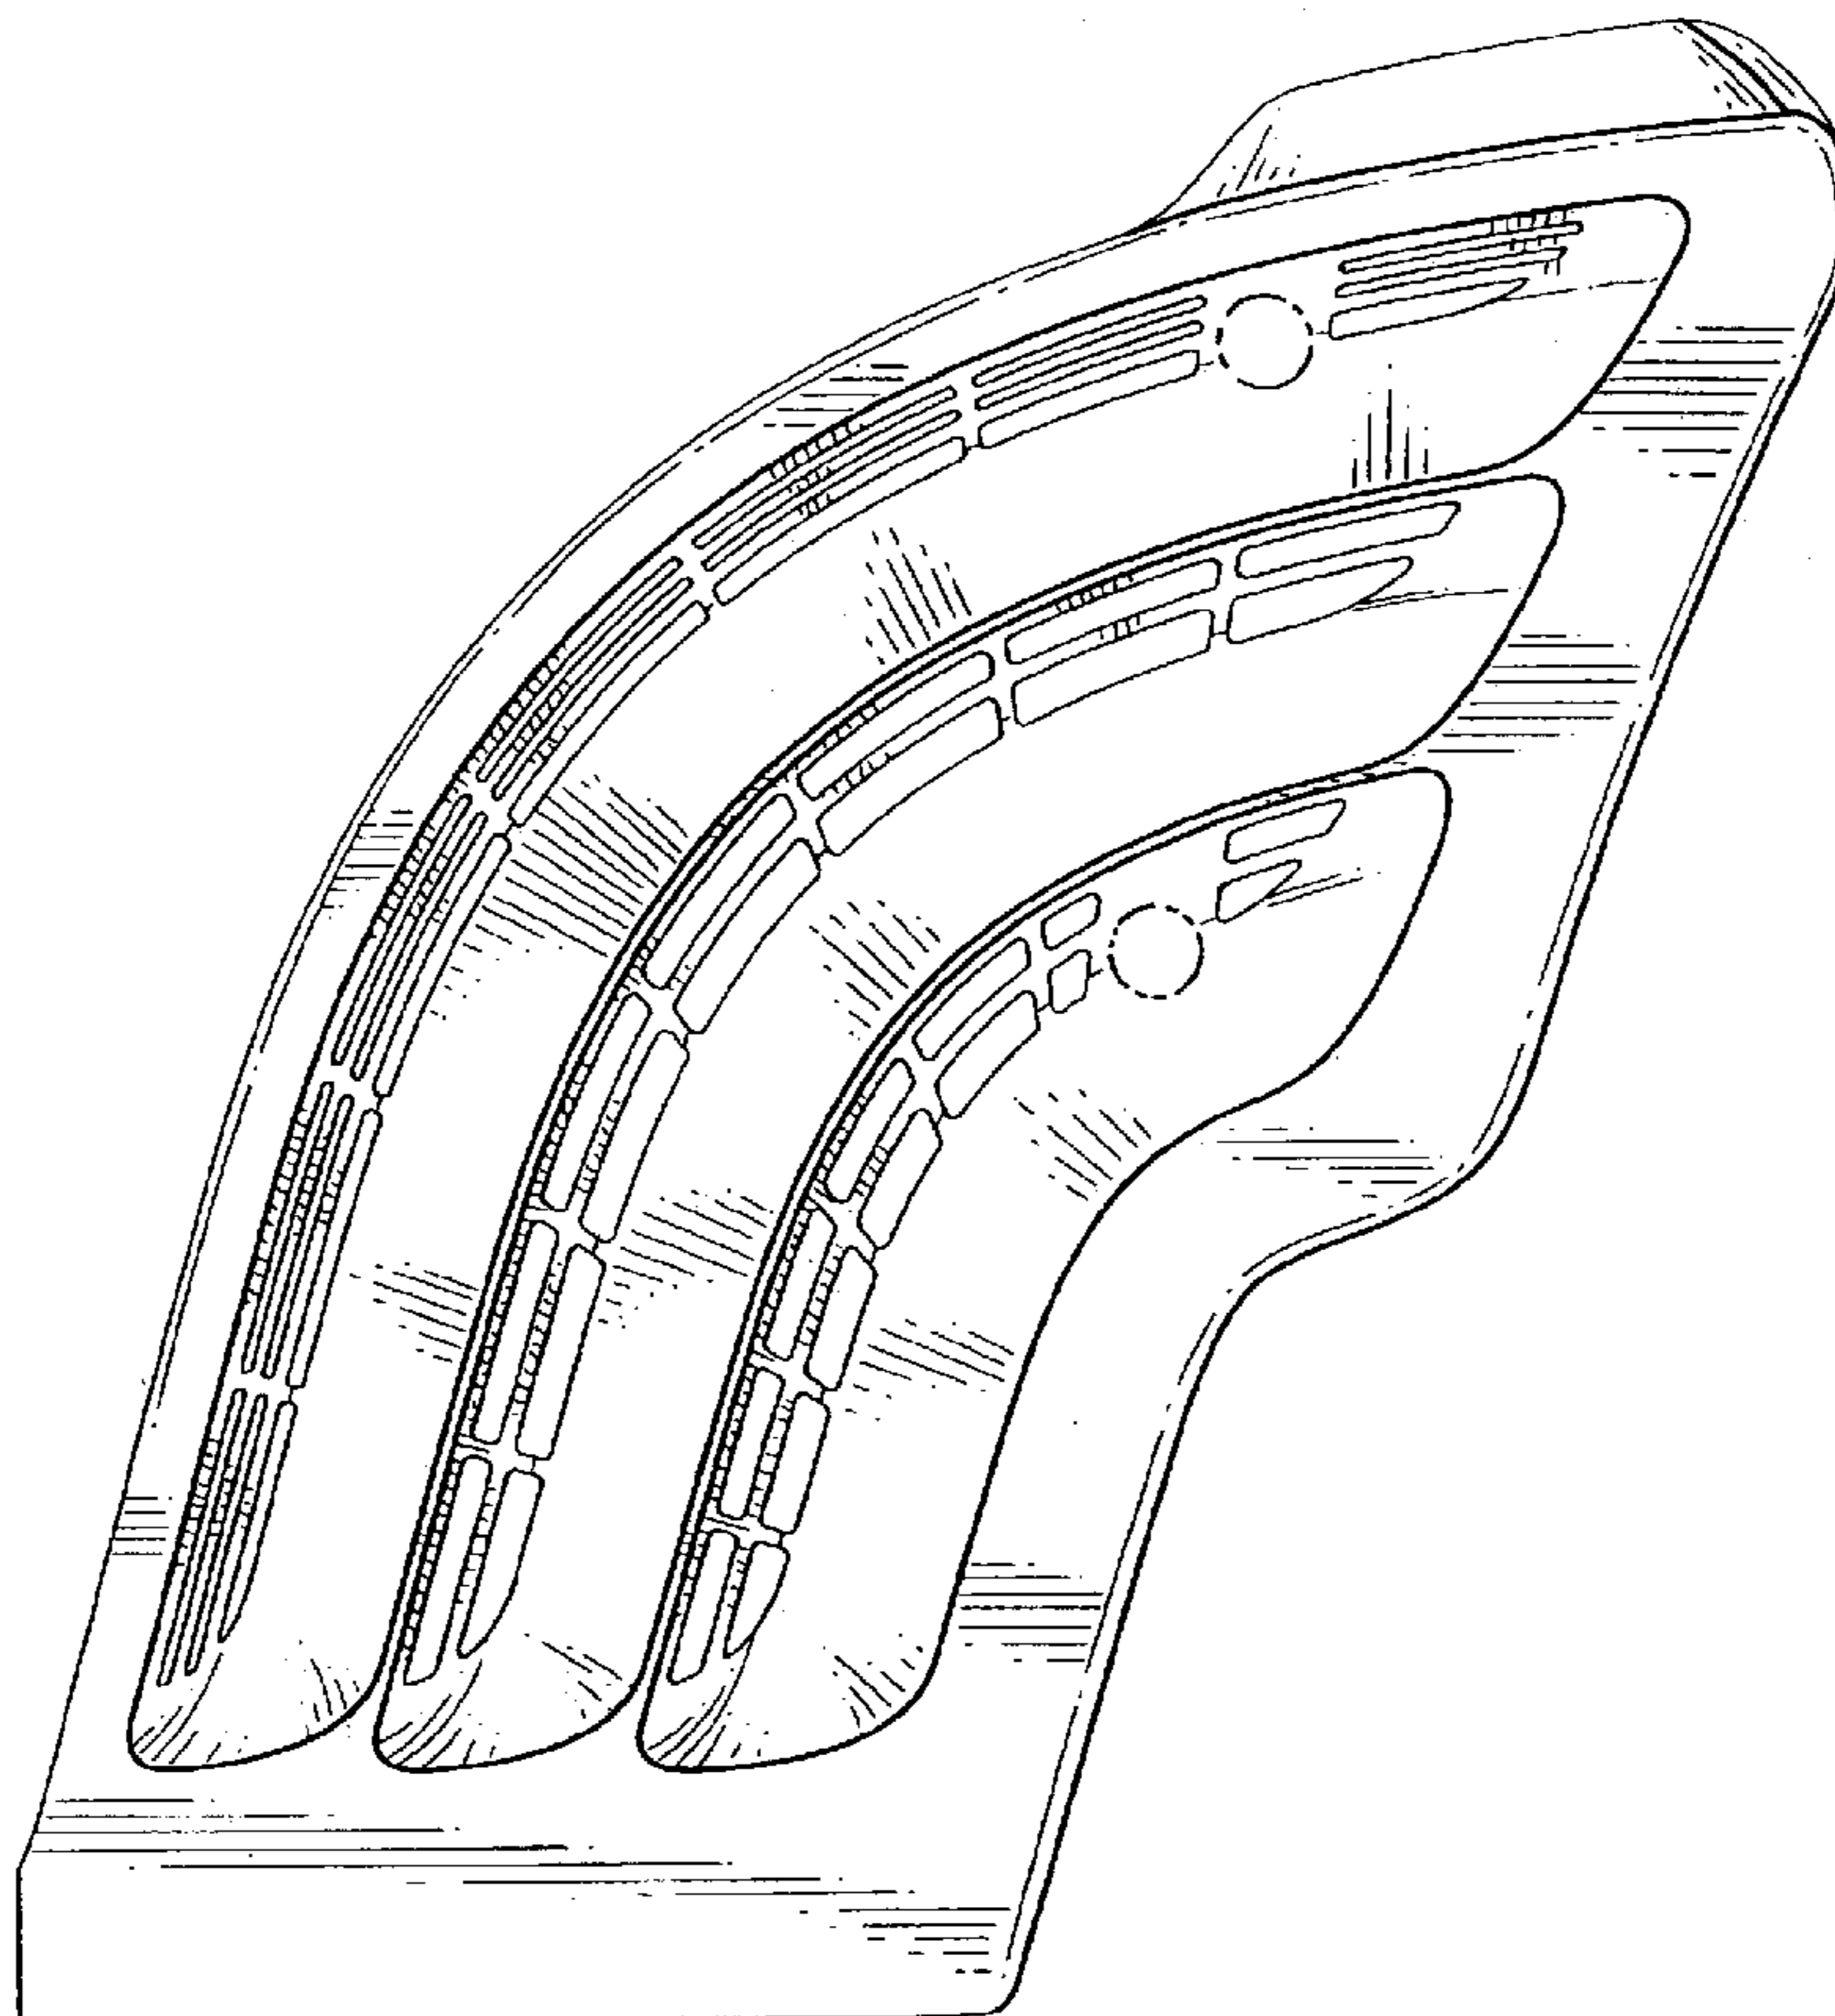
is a bottom view of the vehicle louver design of FIG. 1.
